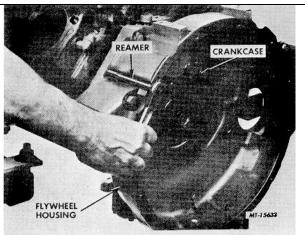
Reaming Flywheel Housing-to-Crankcase Roll Pin Holes
